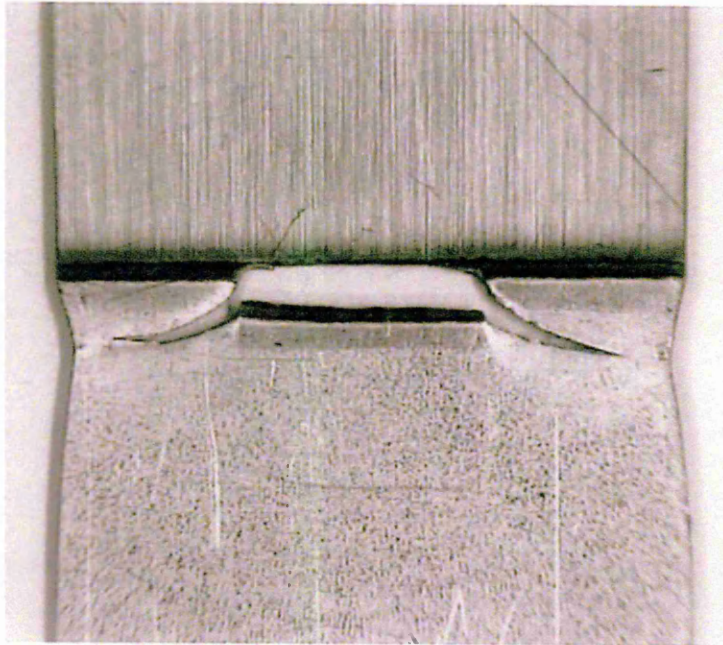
1.2mm V1437 – 1mm 2101 dissimilar metal butt joint fatigue failure – centre weld failure
